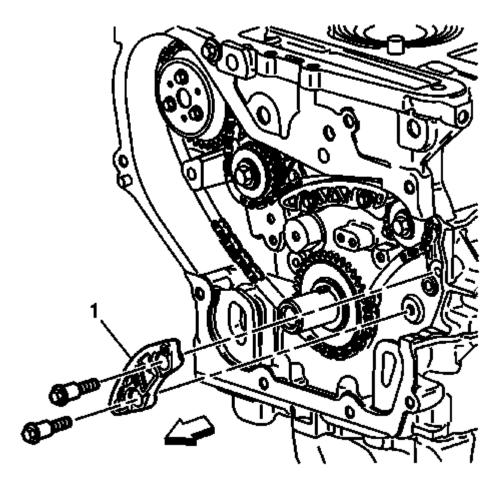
Upper Balance Shaft Drive Chain Guide Courtesy of GENERAL MOTORS COMPANY
